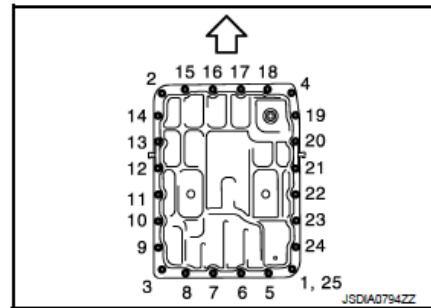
Identifying Oil Pan Mounting Bolts Tightening Sequence
